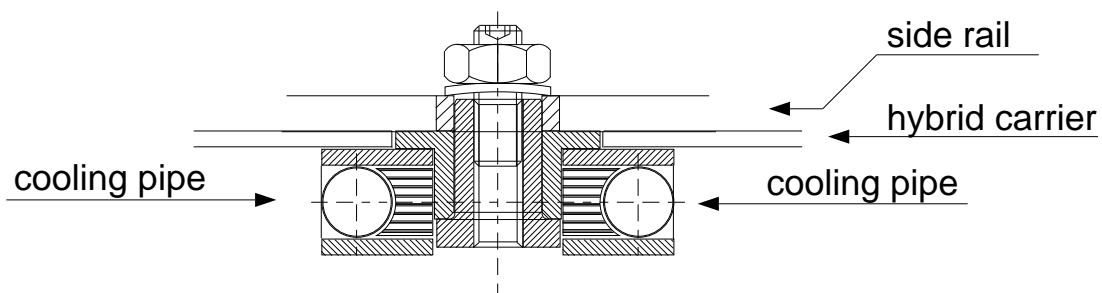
Cross section through the support ring housing two cooling pipes. The screw clamps the carbon fiber frame of the detector module, consisting of the hybrid carrier and the side rails, onto the ring.
